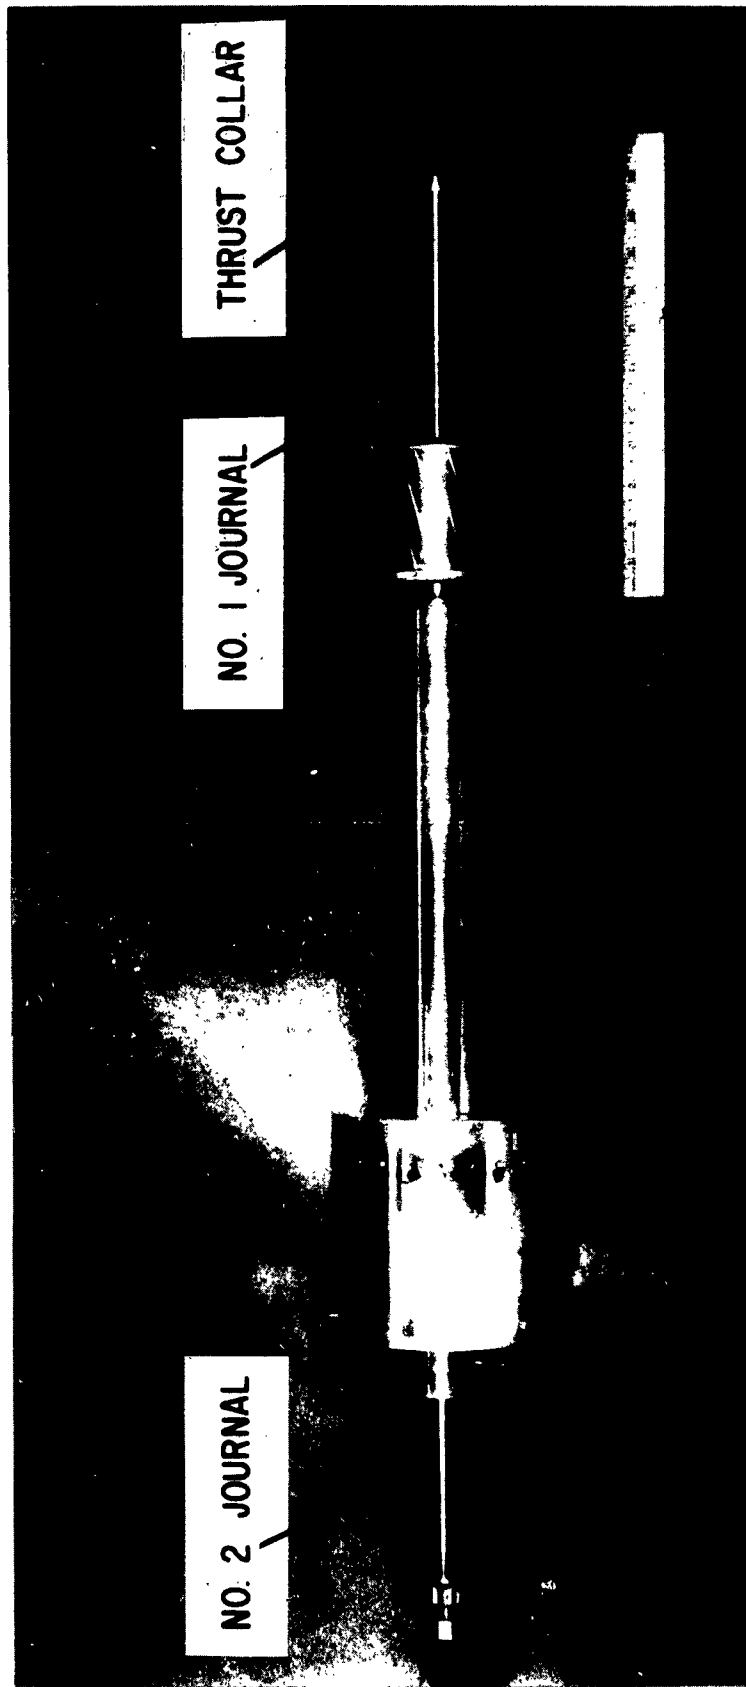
Shaft Assembly of Gas-Bearing Test Machine
